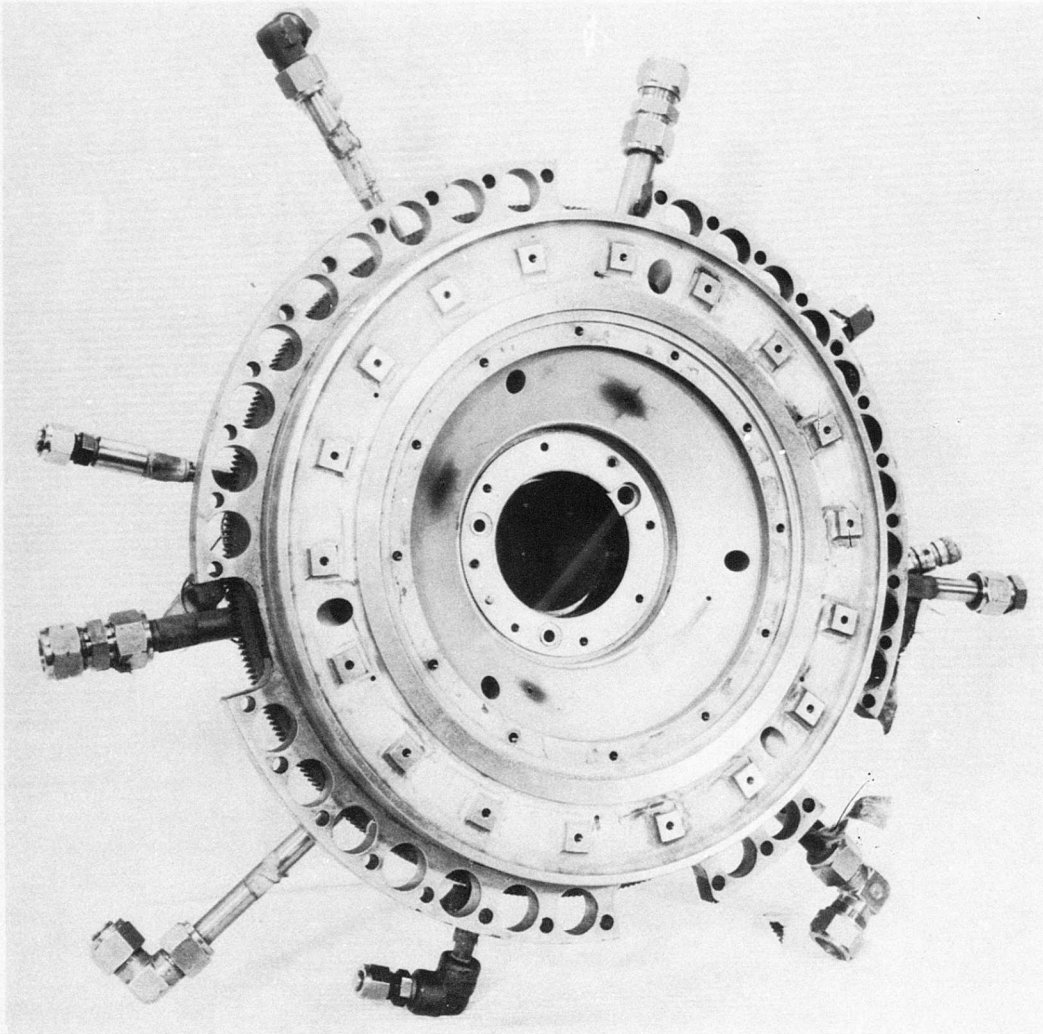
Internal View of Main Bearing Housing Following Phase II Investigation.
